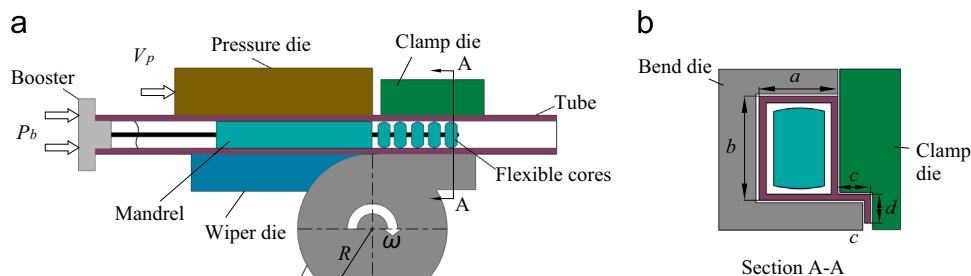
Illustration of tools setup for mandrel-rotary draw bending process.
